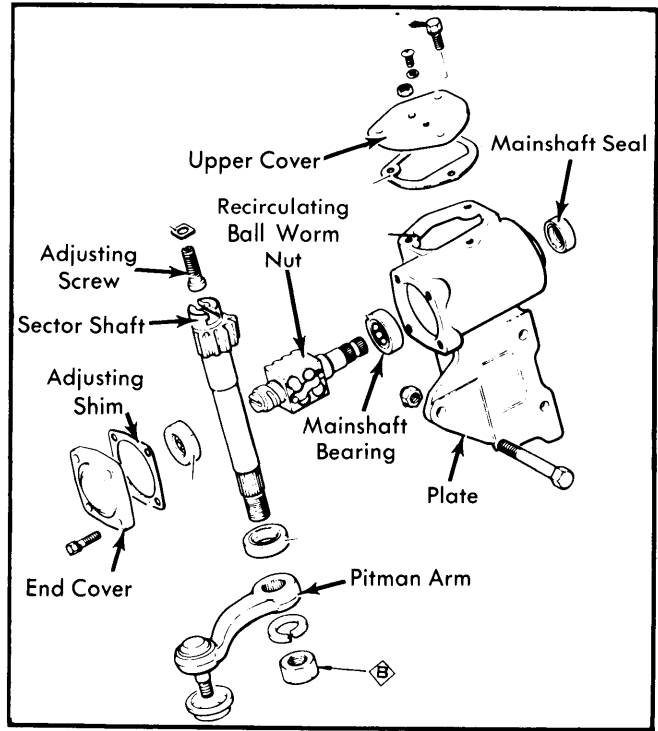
Exploded View of Recirculating Ball & Nut Steering Gear — Large Gear Box
